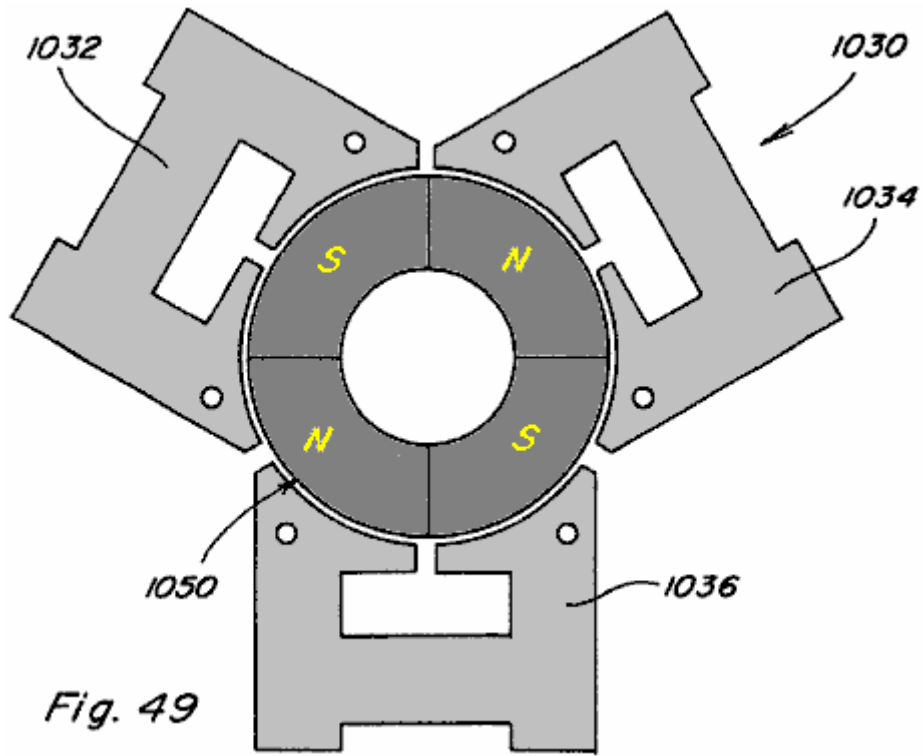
is a top view of another embodiment of a rotating motor like construction; and
